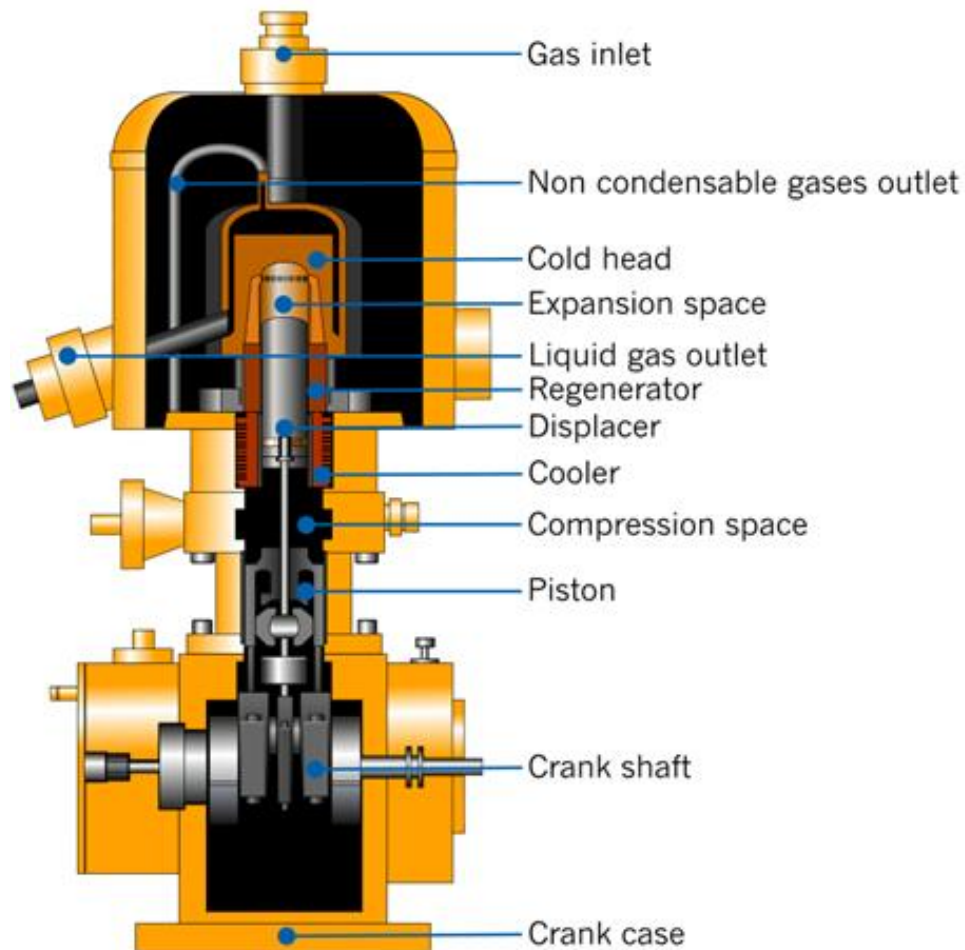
Cut view of the Stirling Cryogenerator showing the major components
